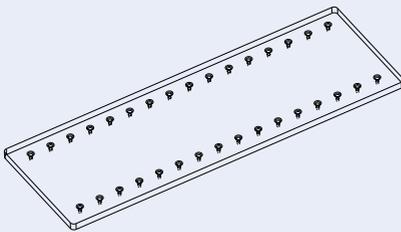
Microscopy slide through-hole platform – version with 32 fluidic interfaces
